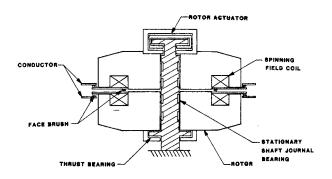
Counter-rotating rotor HPG with face brushes, spinning coil, stationary shaft bearings, and rotor actuation - 15 MJ/m³ energy density gain over face brush actuation machine
